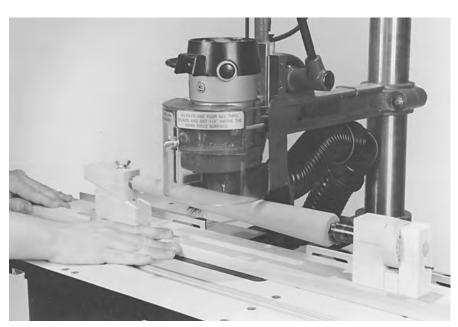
Flute cylindrical legs and posts by guiding the fixture through the cuts with the workpiece mounted firmly between the two centers.
